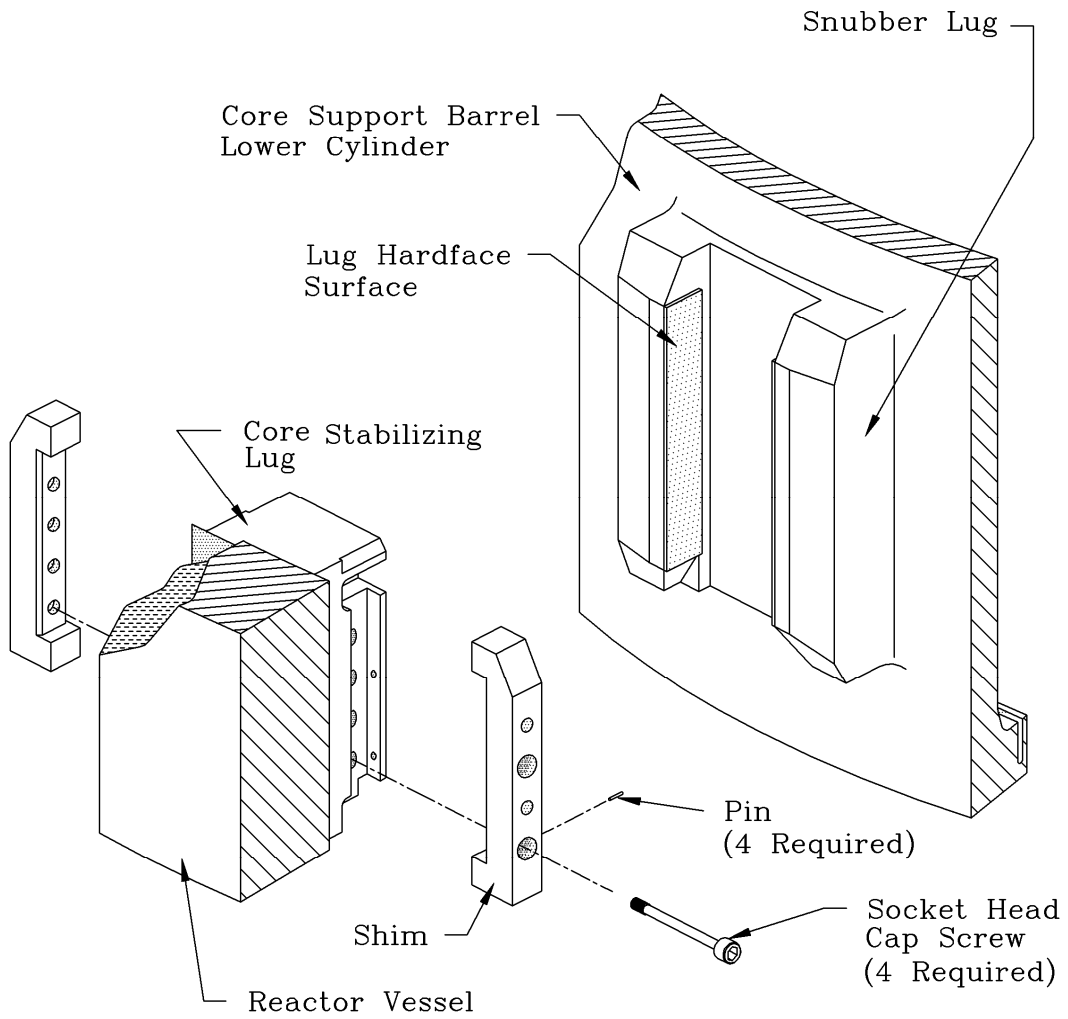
Reactor Vessel / Core Support Barrel Snubber Assembly
